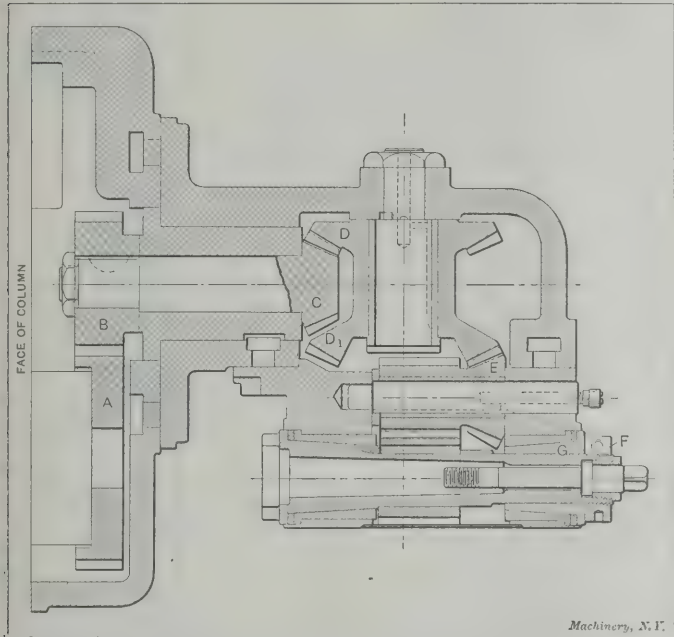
Section through Universal Milling Attachment made by the Kearney & Trecker Co., Milwaukee, Wis.
